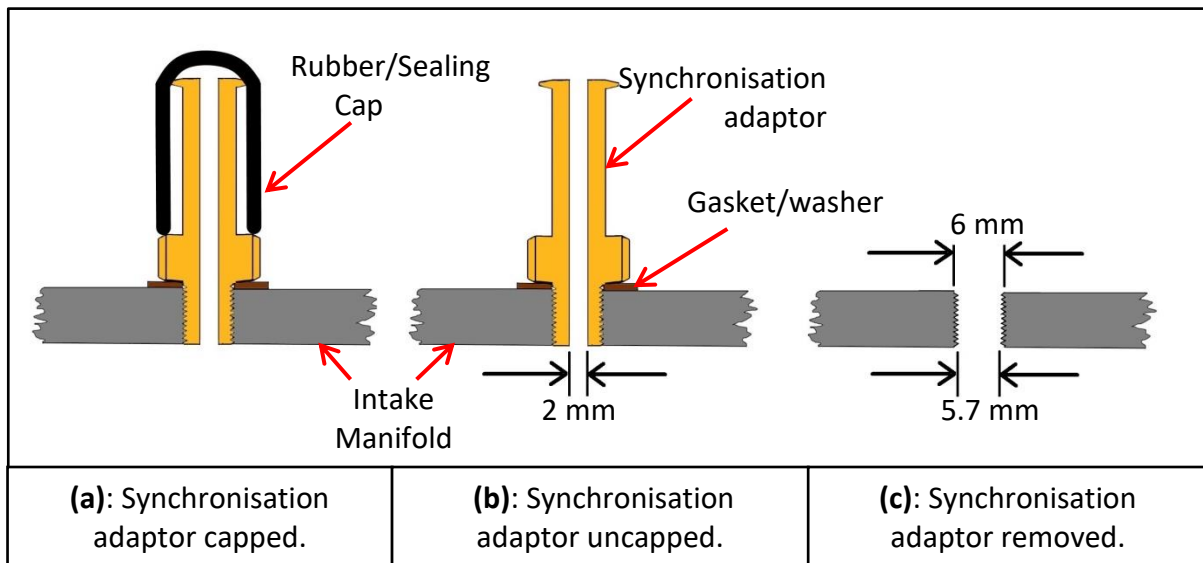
Cross section of a Carburettor Synchronisation Adaptor
